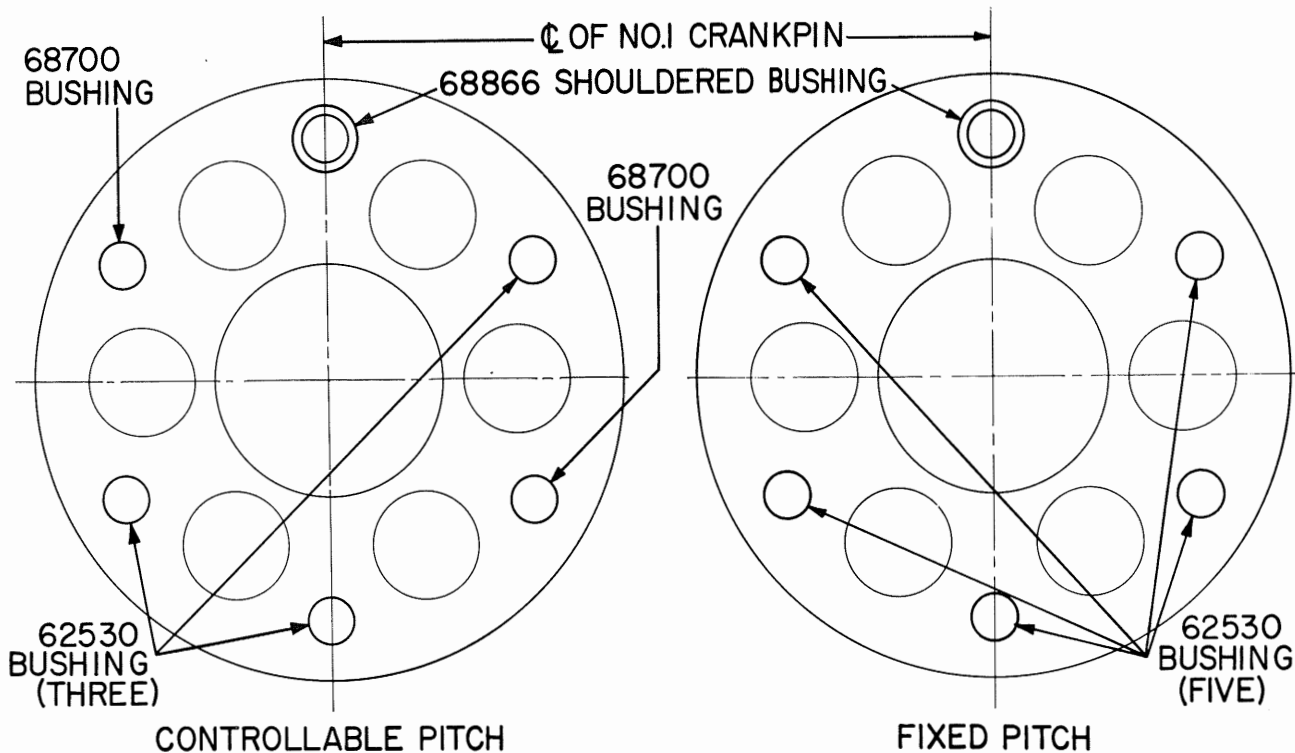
Arrangement of Propeller Flange Bushing, O-320 Engine
